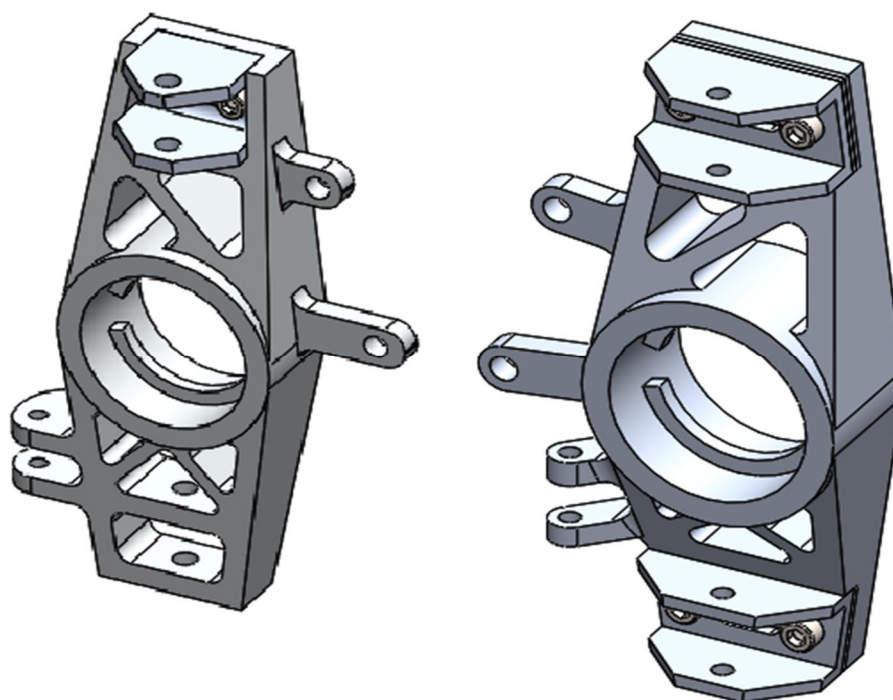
3D CAD of Rear Upright (Left) and Front Upright (Right)
